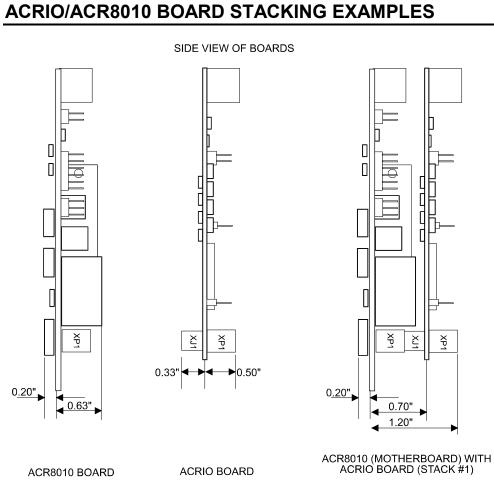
ACR8010 Board Stacking Mechanical Dimensions Examples
